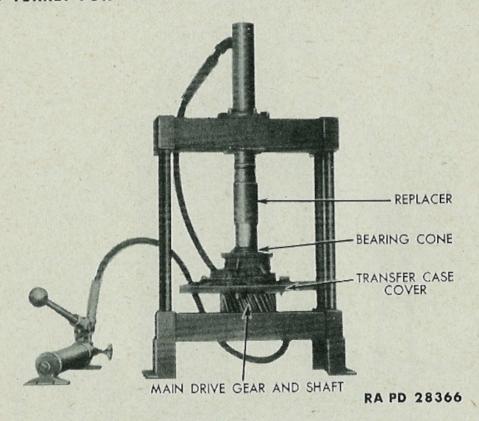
Pressing Bearing Cone on Main Drive Gear Shaft with Replacer 41-R-2395-9
